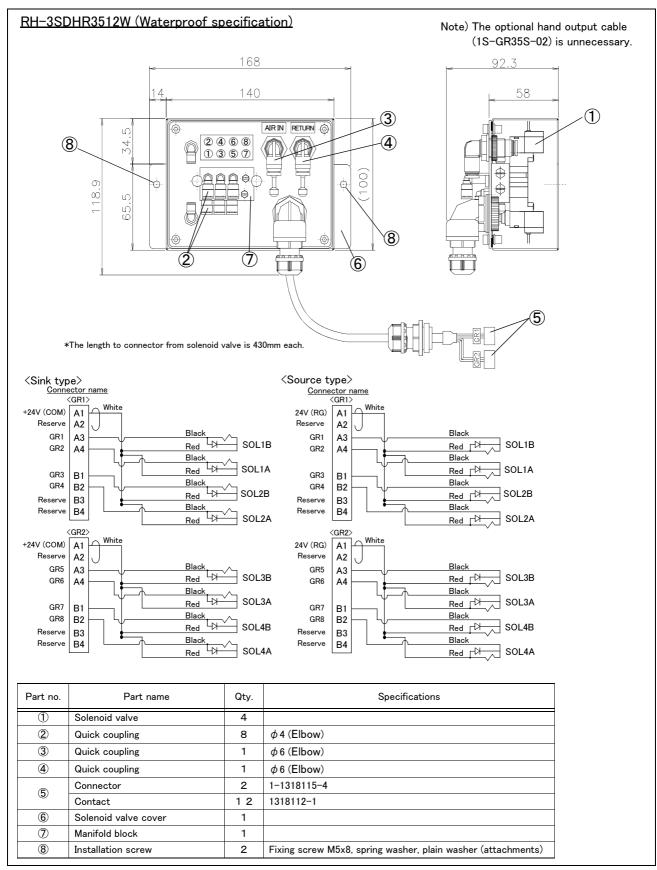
Outline dimensional drawing (RH-3SDHR series: Waterproof specification)
